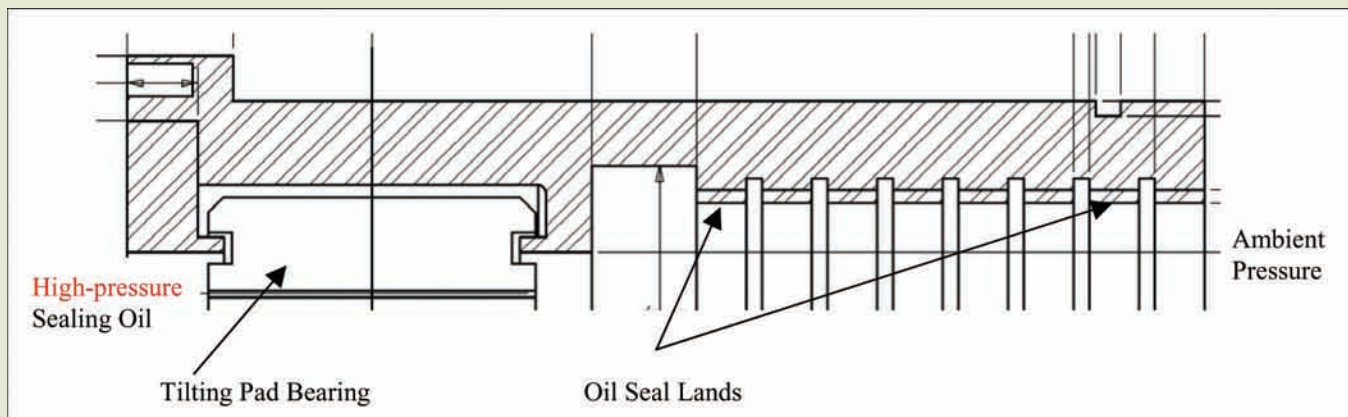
Schematic of final bearing-seal configuration. Tilting pad bearing with babbitted land, fixed geometry oil seal.
